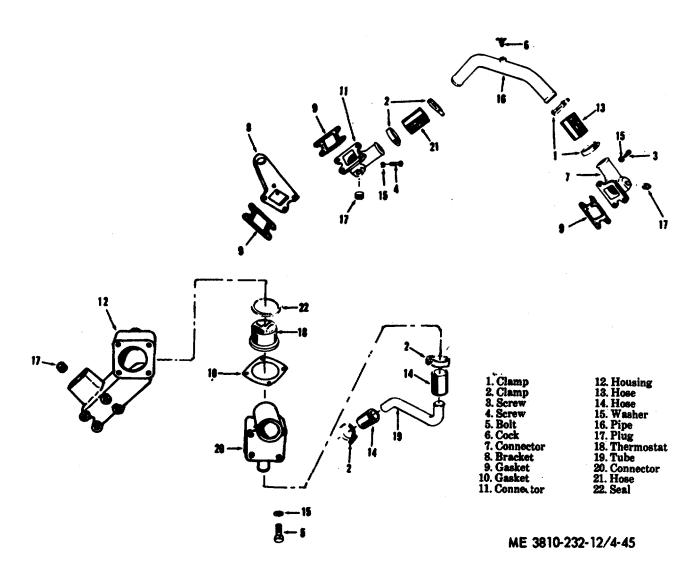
Carrier engine coolant lines and fittings. Removal and installation (Model 2385).
